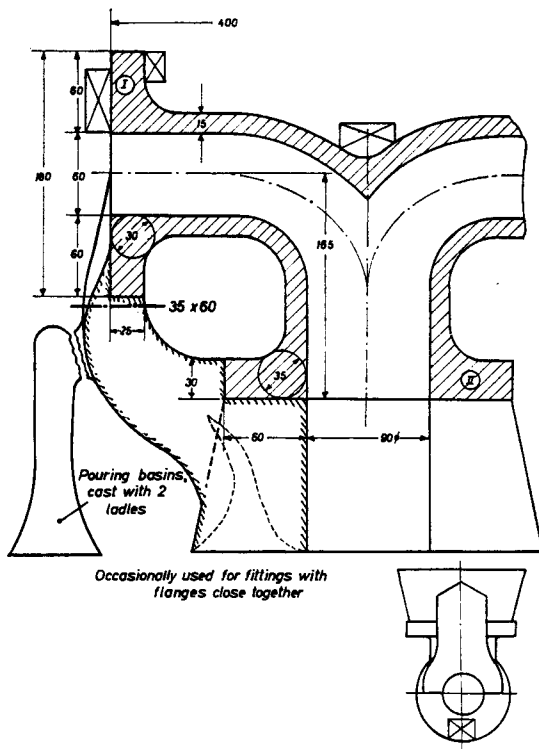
Neck of a distributor casting. Alternative 6: moulded horizontally, bottom cast.
